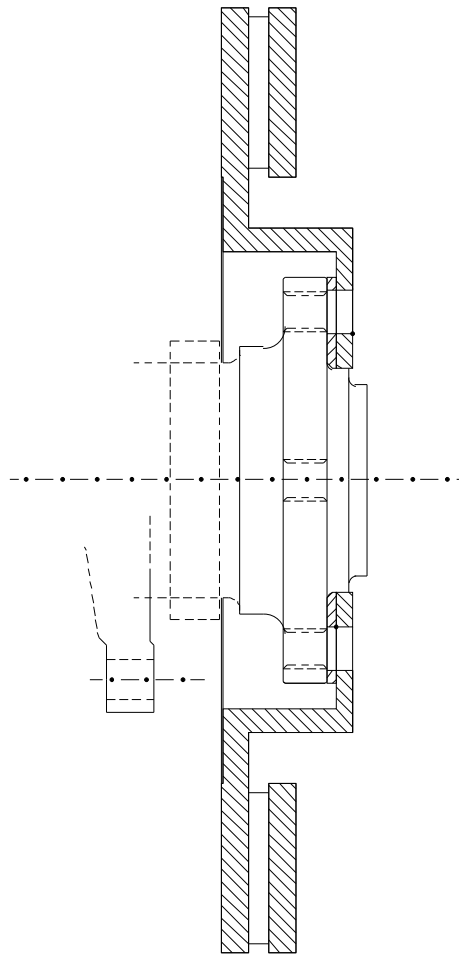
Showing the brake disc and inner wheel spacer assembled on an E30 hub.
